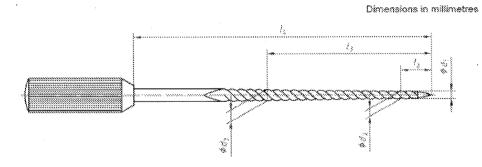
Type 1: Standard-sized instrument: taper = 2 % — Dimensions, locations
